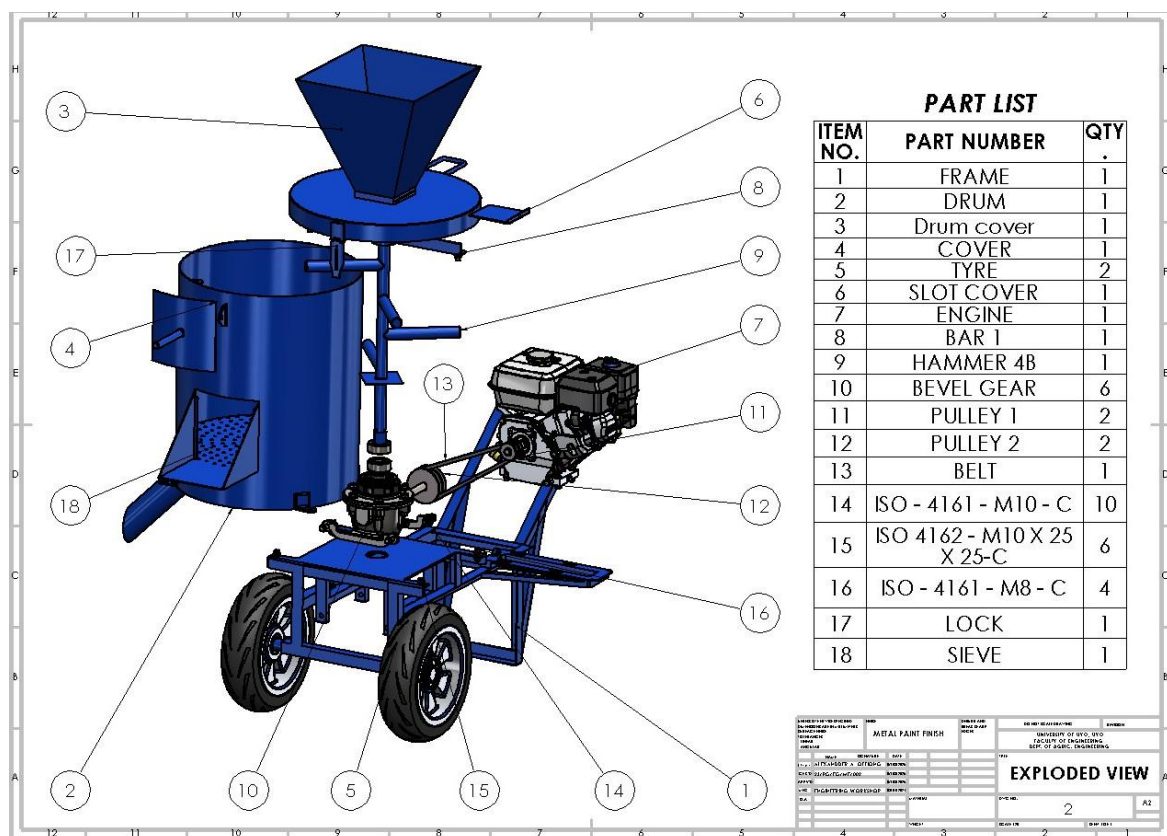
Exploded coloured view of model drawing of the vertical palm fruit digestion machine by Reseracher (2025)
